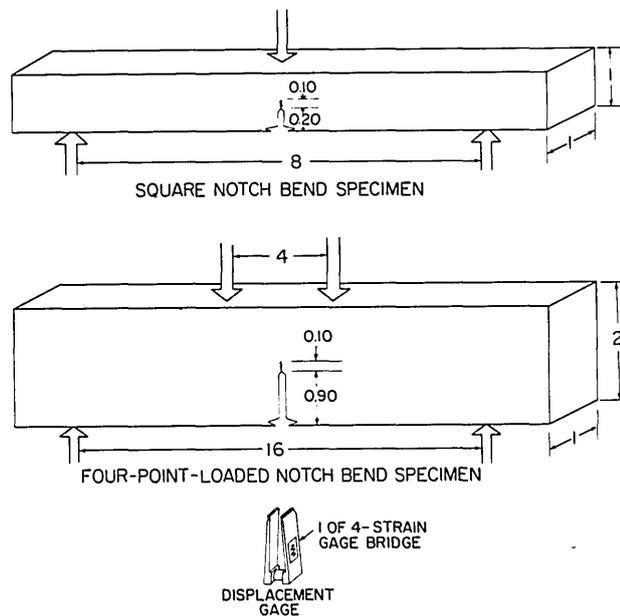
Dimensions of the three-point-loaded square notch bend (SNB) specimen, the four-point-loaded NB specimen, and a sketch of the beam displacement gage used to detect initial crack instability
